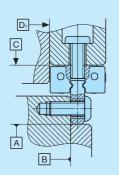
Reference mounting surface of LWL1···Y and typical mounting structure ②
